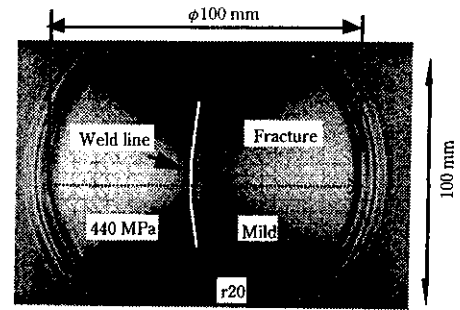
Weld line and fracture portion of test piece after plane strain stretch forming
